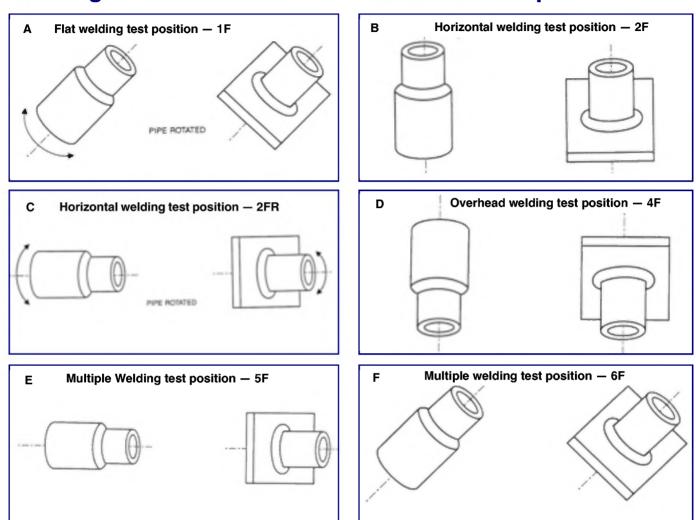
Welding test positions and their designations for fillet welds in pipe.
